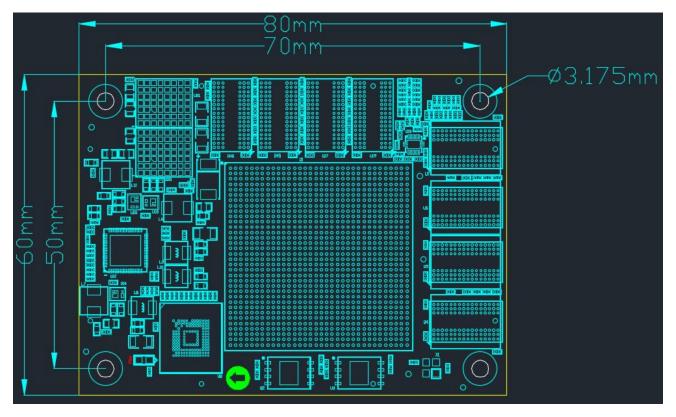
ACU7EVB Core Board Size Dimension
